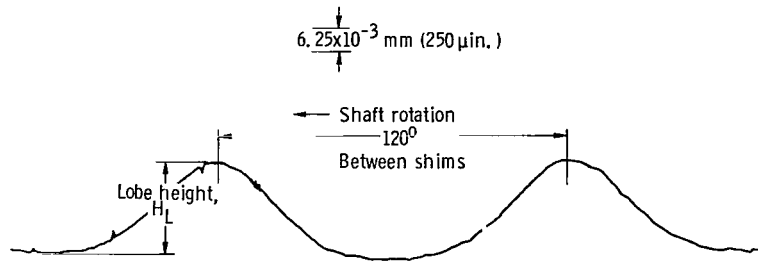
Typical circumferential profile trace of inside surface of shimmed bearings.
